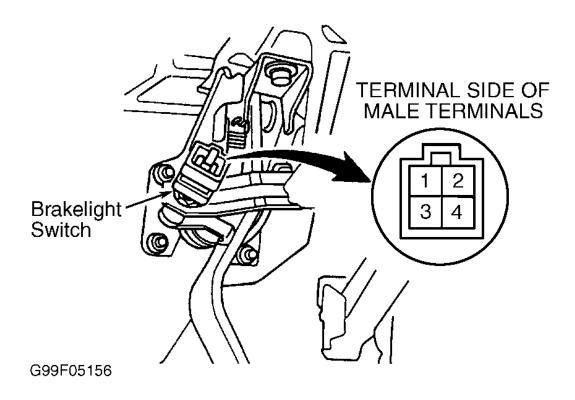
Identifying Brake Light Switch Component Connector Terminals Courtesy of AMERICAN HONDA MOTOR CO., INC.
